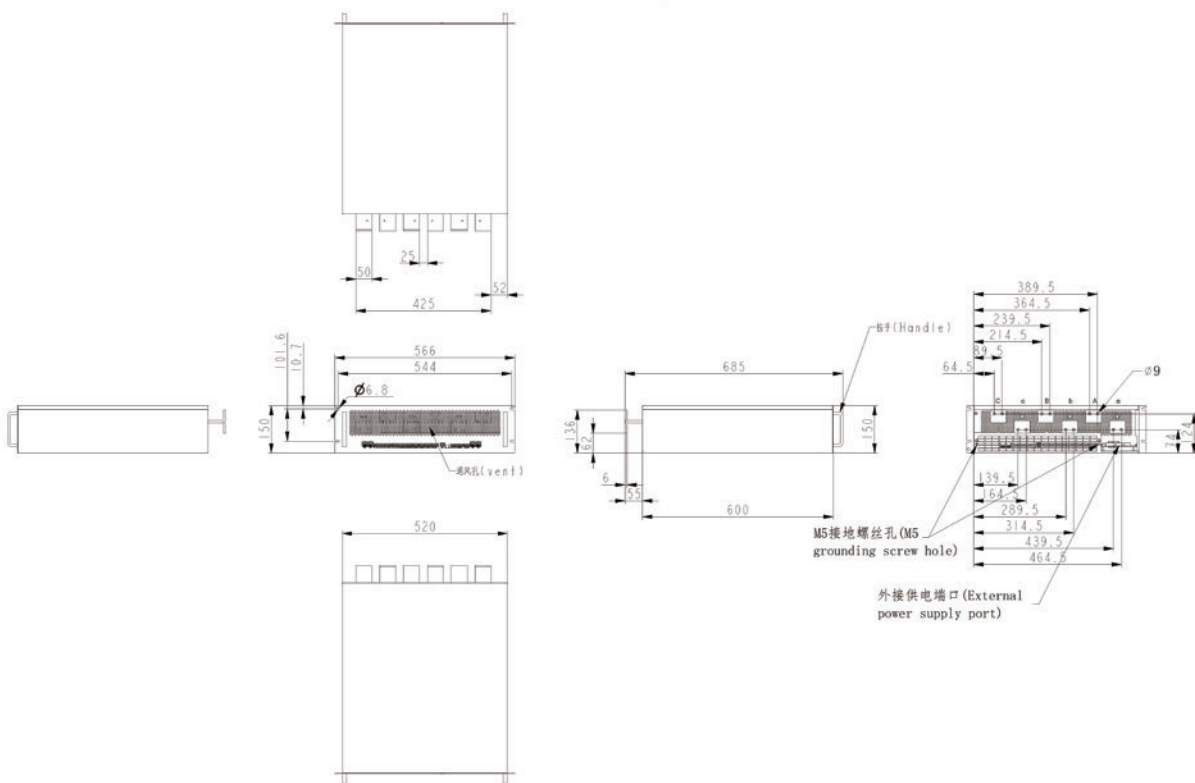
HT-600STS Product Mounting Dimensions (Unit: mm)
